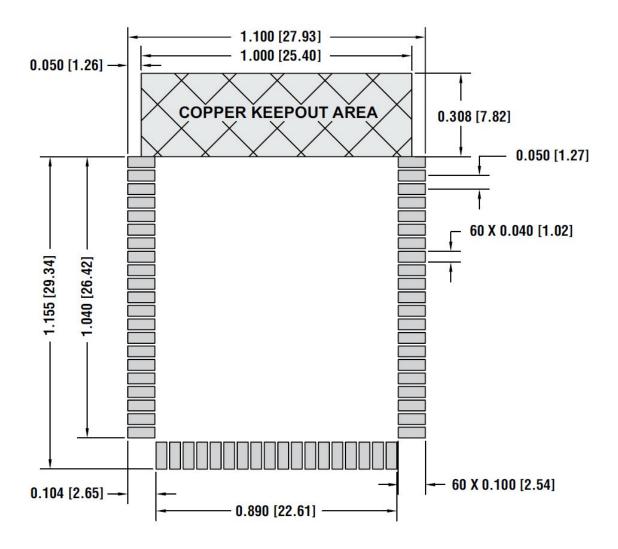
Module Land Footprint for the SM700PC1 Module
